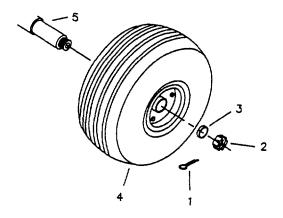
Wheel Assembly, Model 204-050-200-5
